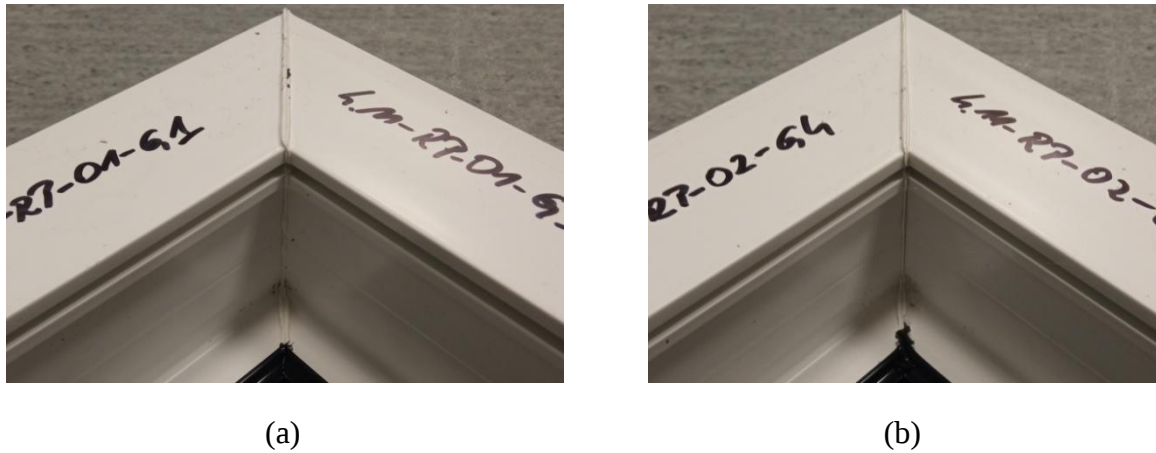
Representative welds from the preliminary trials: (a) first head, (b) fourth head.
